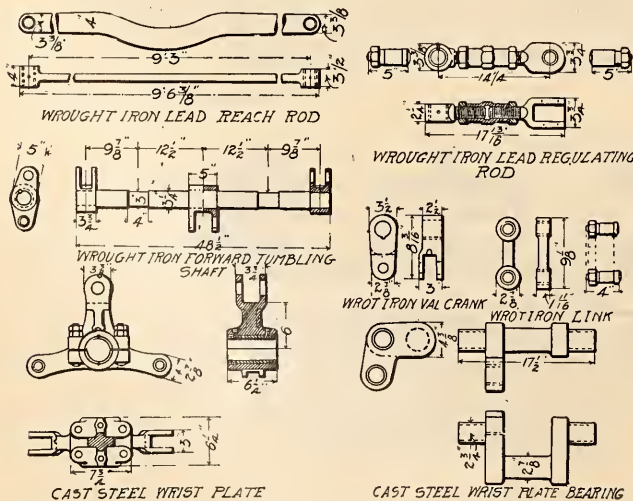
DETAILS OF VALVE MOTION—YOUNG ROTARY VALVE GEAR FOR LOCOMOTIVES.
